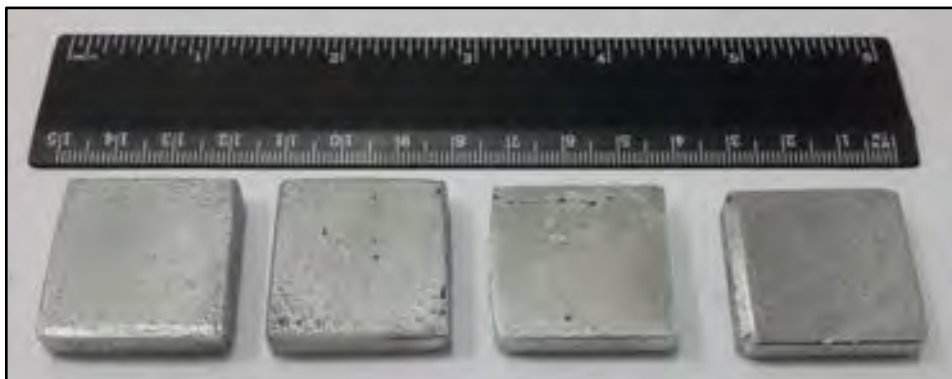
Preformed foamable samples (dimensions: 27mm x 27mm x 6mm) fabricated from Alumix 13
